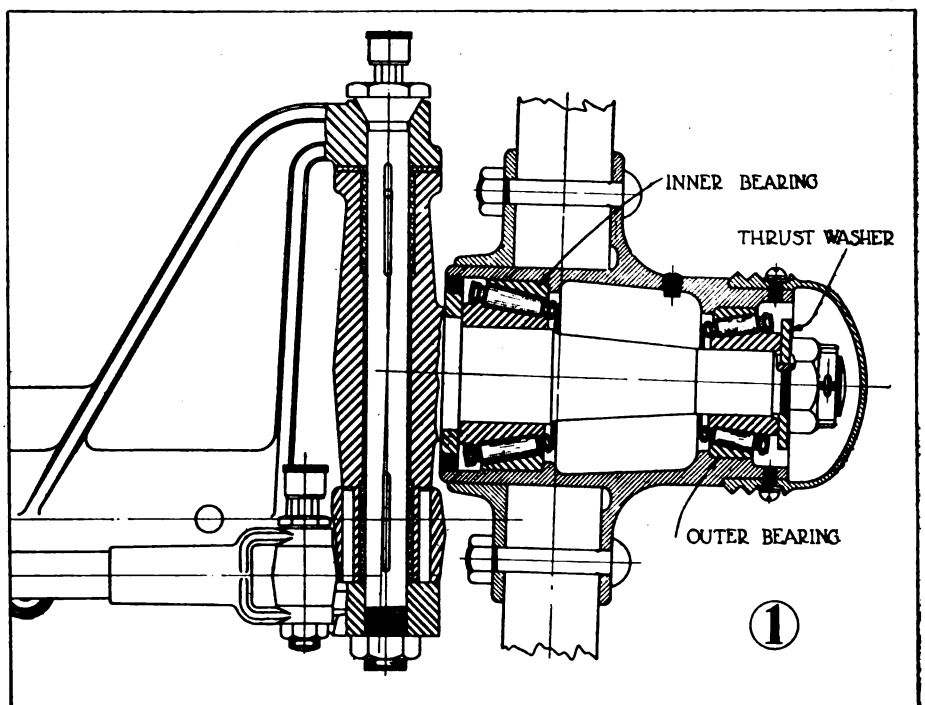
A section of part of the wheel hub, steering spindle and axle, which are disassembled in overhauling the front axle
